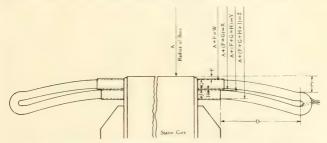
SKETCH SHOWING CONVENTIONAL CROSS-SECTION OF WINDING IN A MACHINE
